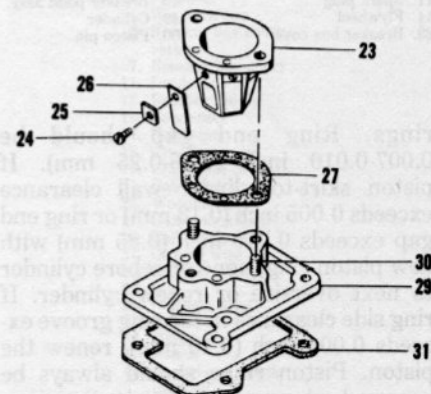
Exploded view of pyramid type reed inlet valve assembly and carburetor adapter used on Models MC-45 and MC-75. Six steel reeds (26) are used.
